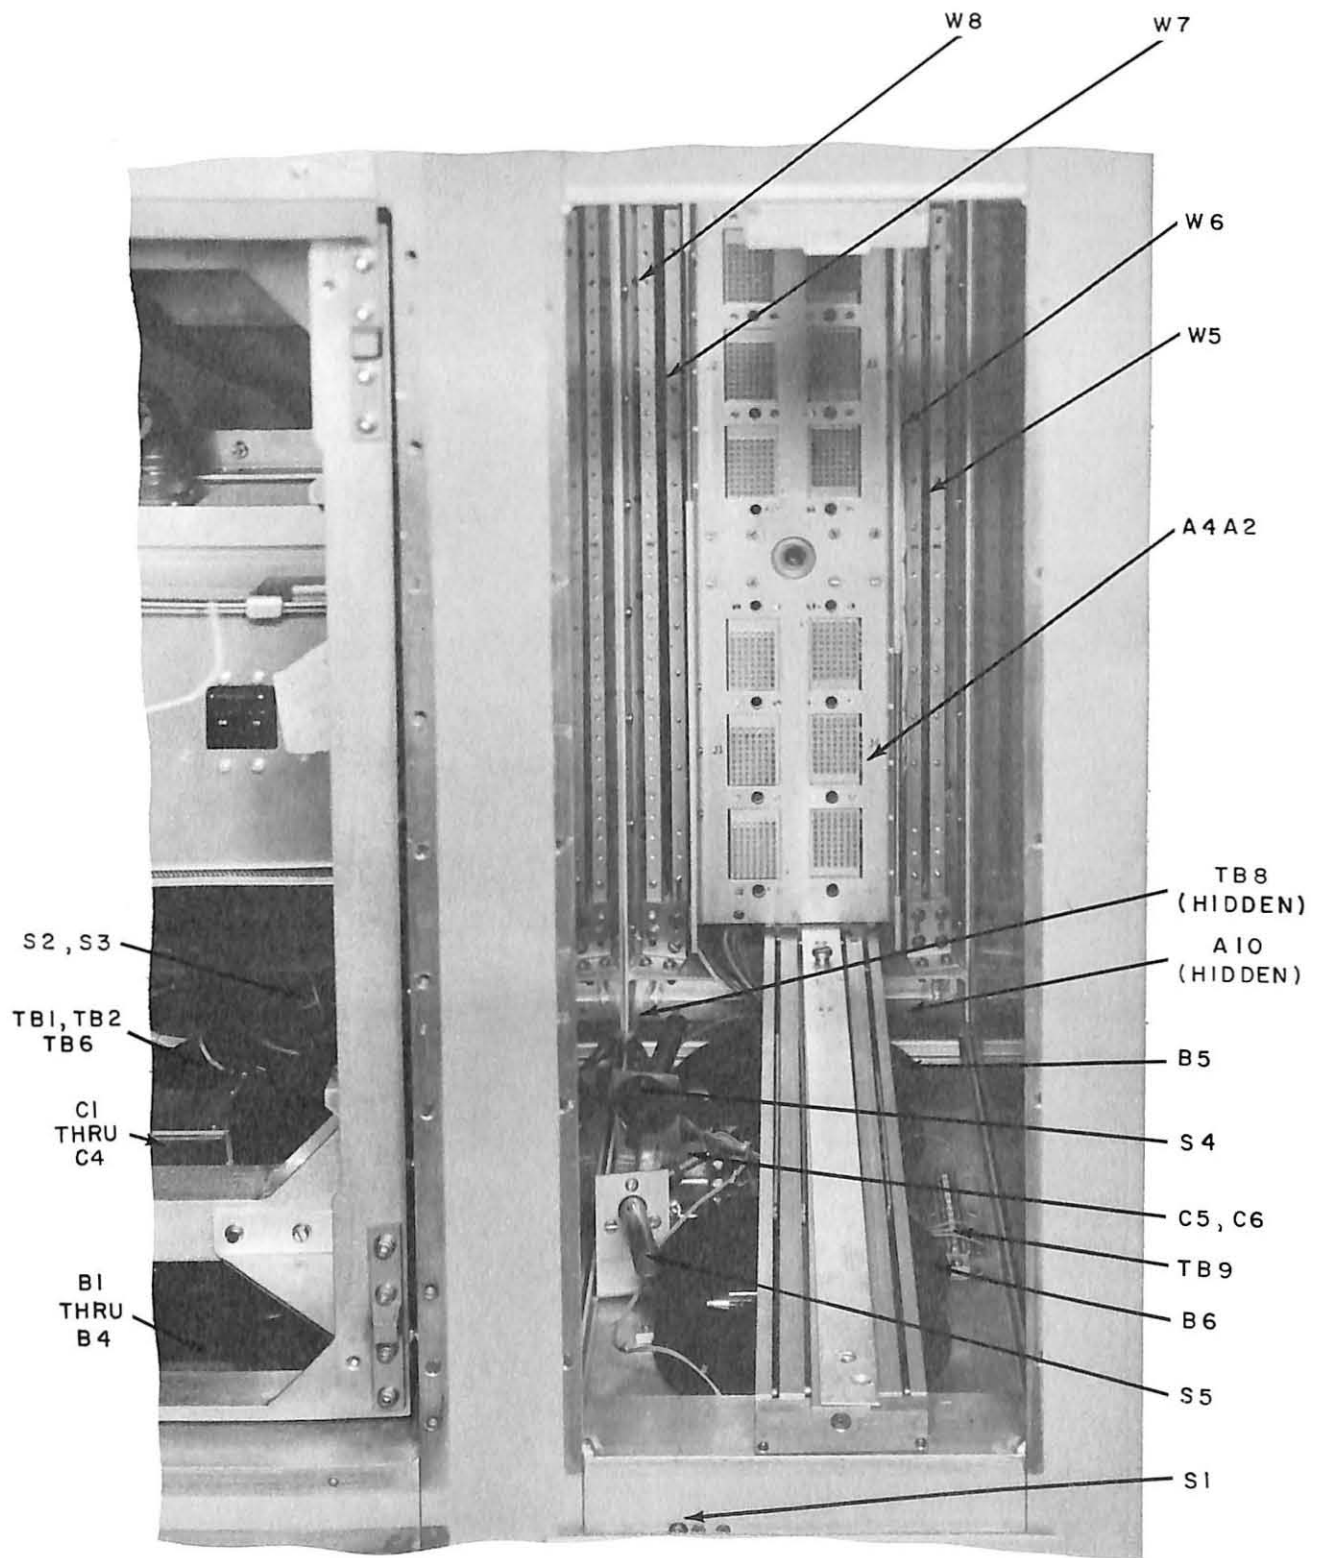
Magnetic Tape Control Cabinet, Interior View, Lower Half, Air Cooled
